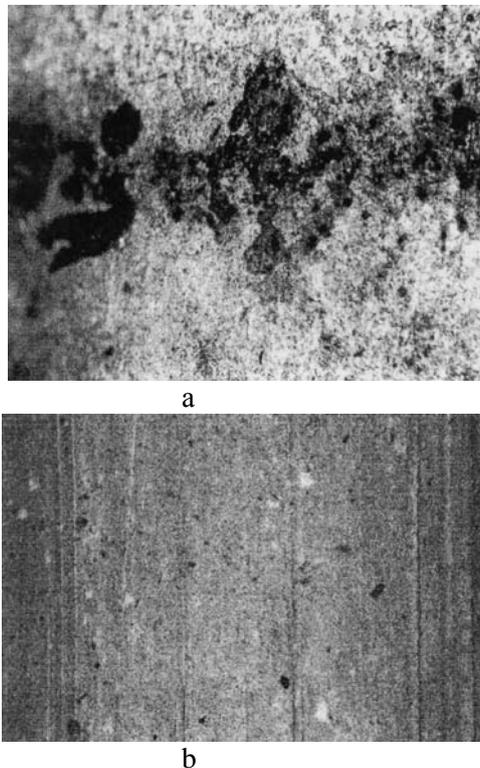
Macrosurface of roller bearing of rolling mill 150-1: *a* – no processing; *b* – after geoactivator processing
